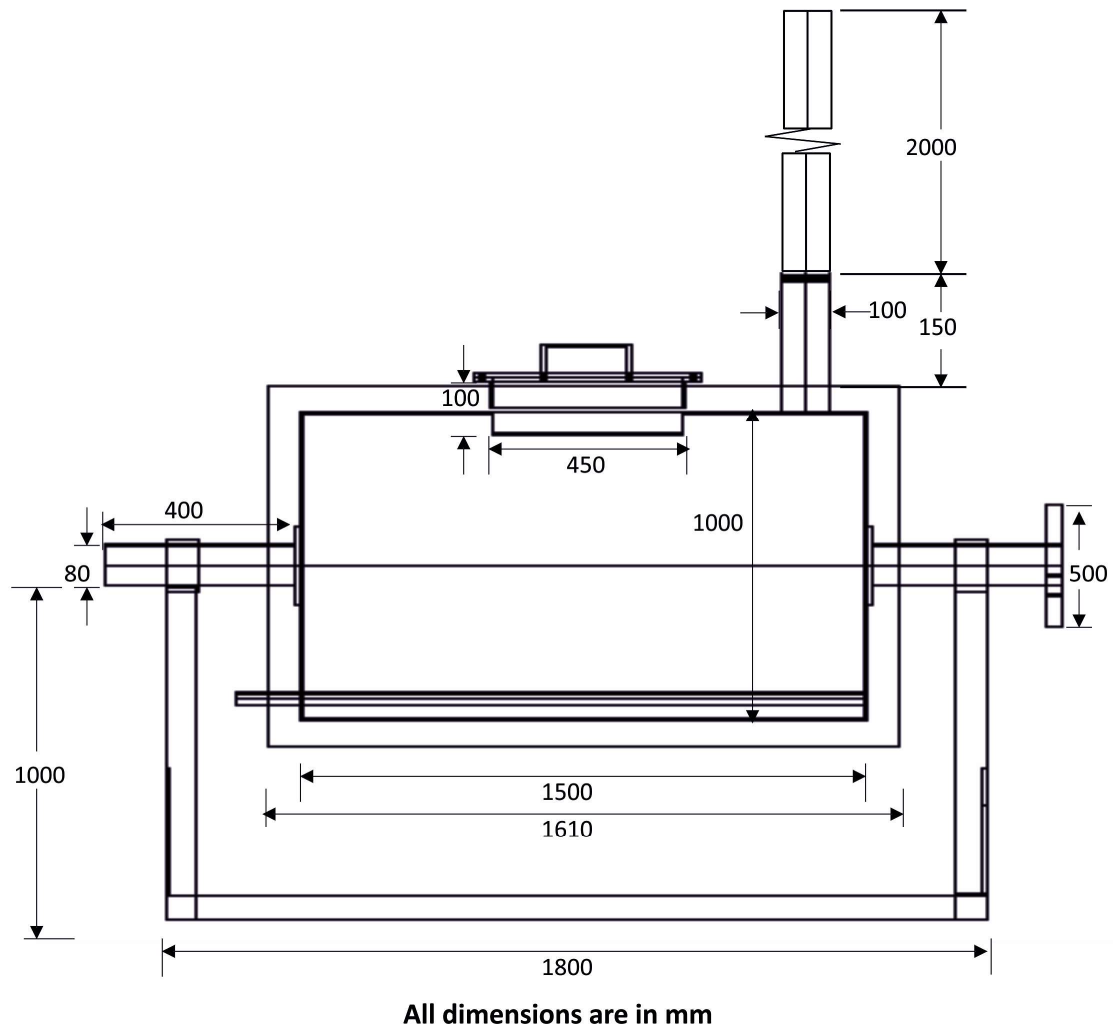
Front View of Biochar Production Unit with Dimensions
